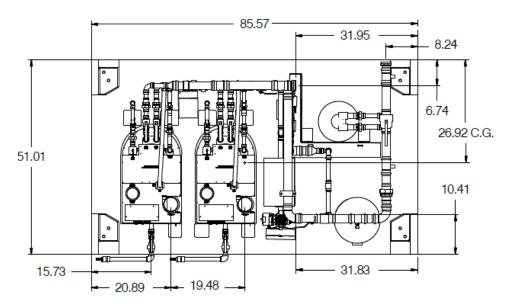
LC-N-400-2 Dimensional Drawing – Overhead
